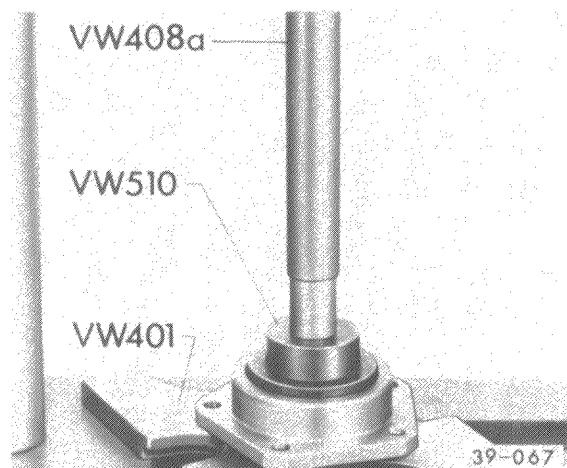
Pinion oil seal (inner) in cover, installing
